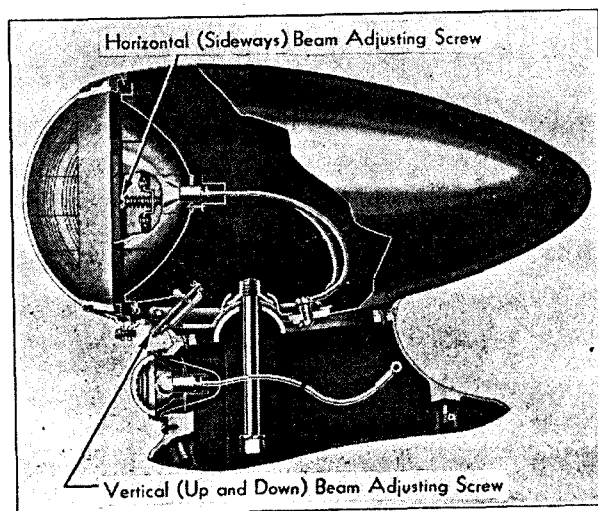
Sectional view of Cadillac Multibeam headlamp and parking lamp showing beam adjusting screws. The LaSalle headlamps are similar except that no beam adjusting screws are provided and the parking lamp bulbs are located in the upper part of the reflectors.
